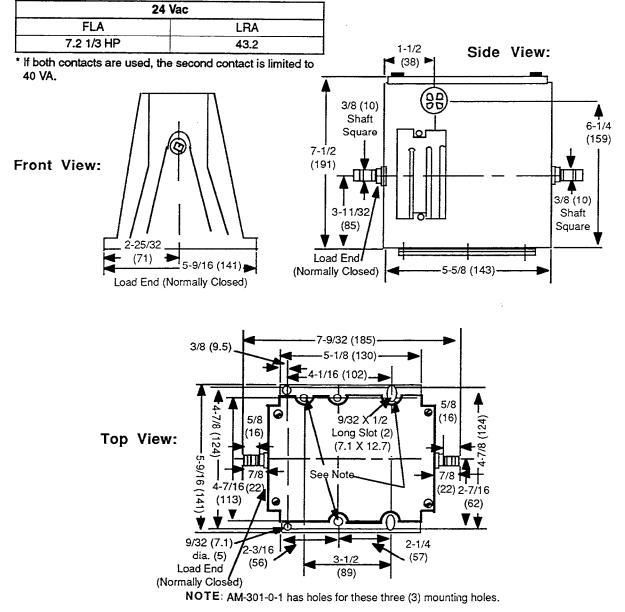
Mounting Dimensions for MM-400, MM-500 Series
